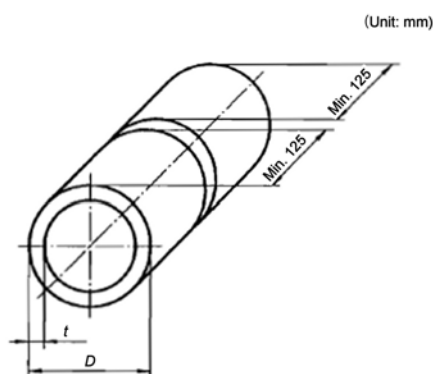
Dimensions and types of test assembly for pipe butt welds
